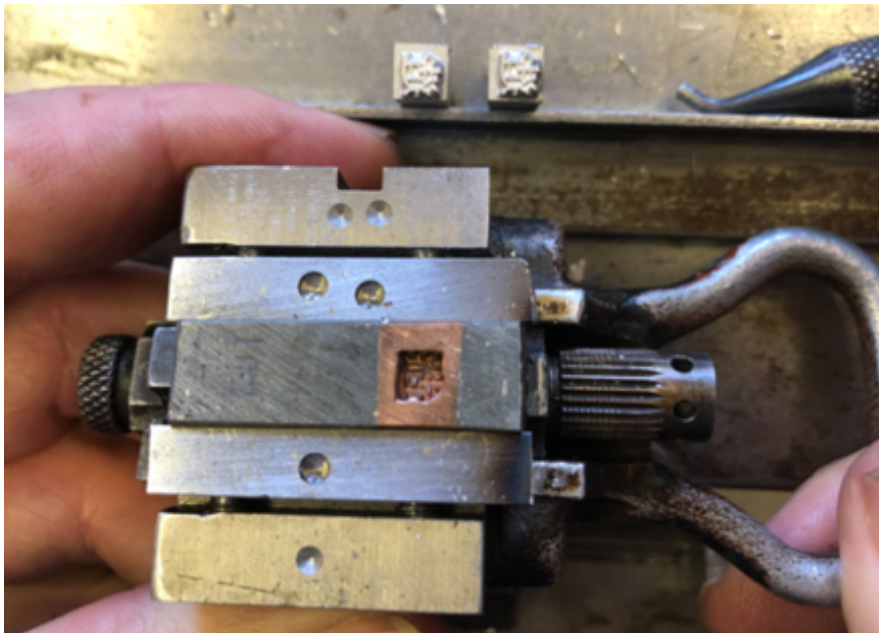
A matrixholder for Monotype machine. This machine model was not the original machine used by Tetterode to produce Chinese type, but Ronald Steur adapted its matrix holder so that it could now be used to cast Hong Kong Type. Source: Source: <https://www.mpweekly.com/culture/香港字-鑄字-活字印刷-169188>
